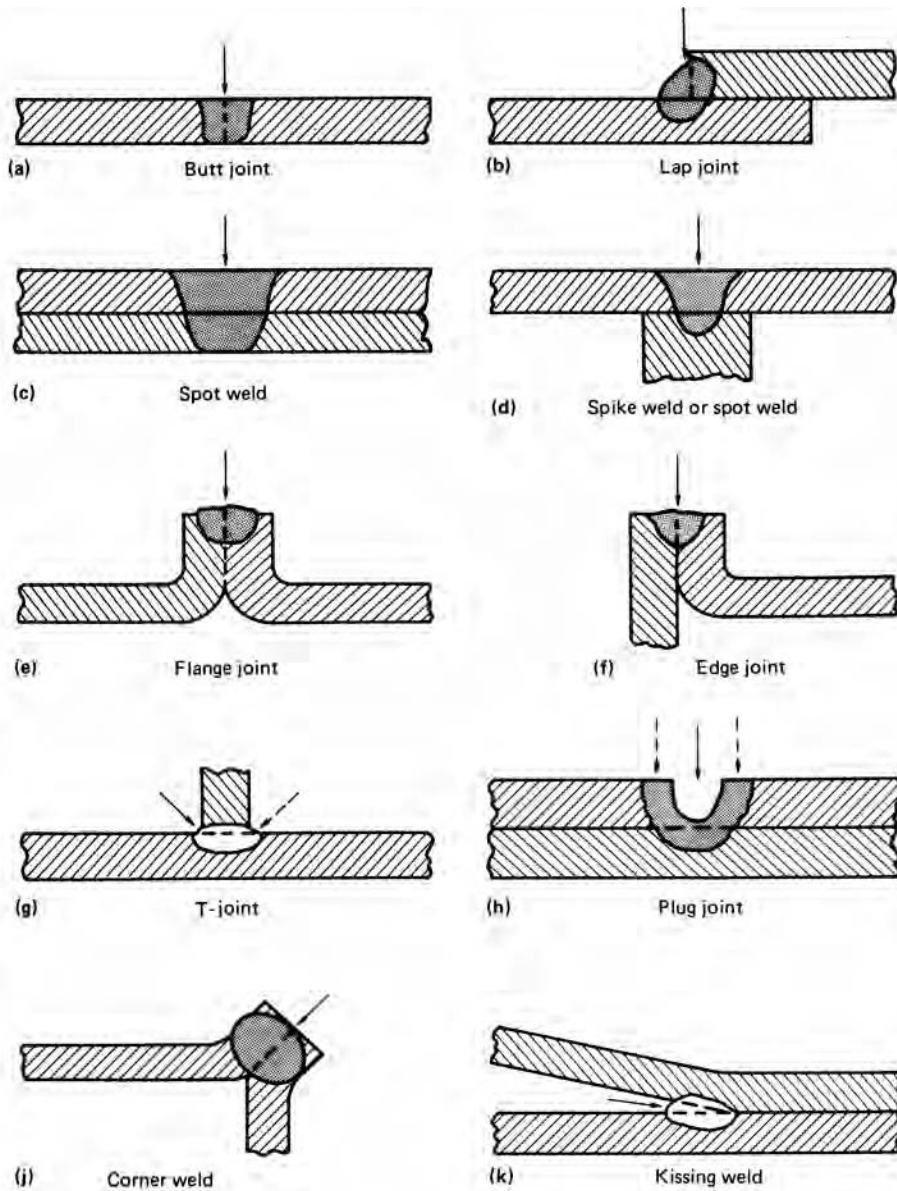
Joint designs for laser beam welds on sheet metal. Arrows show direction of laser beam. Source: Ref 1
